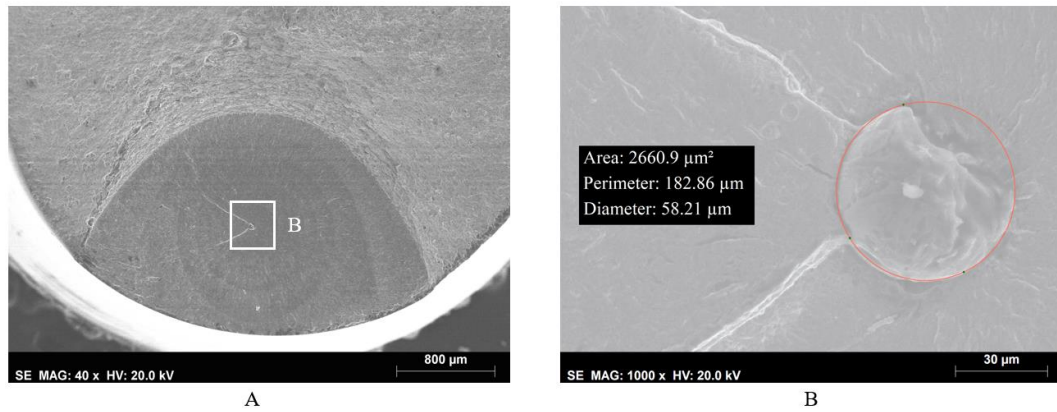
Internal crack initiation specimen 1: (A) 40x fatigue fracture surface overview; (B) 1000x crack initiation inclusion with measured diameter.
